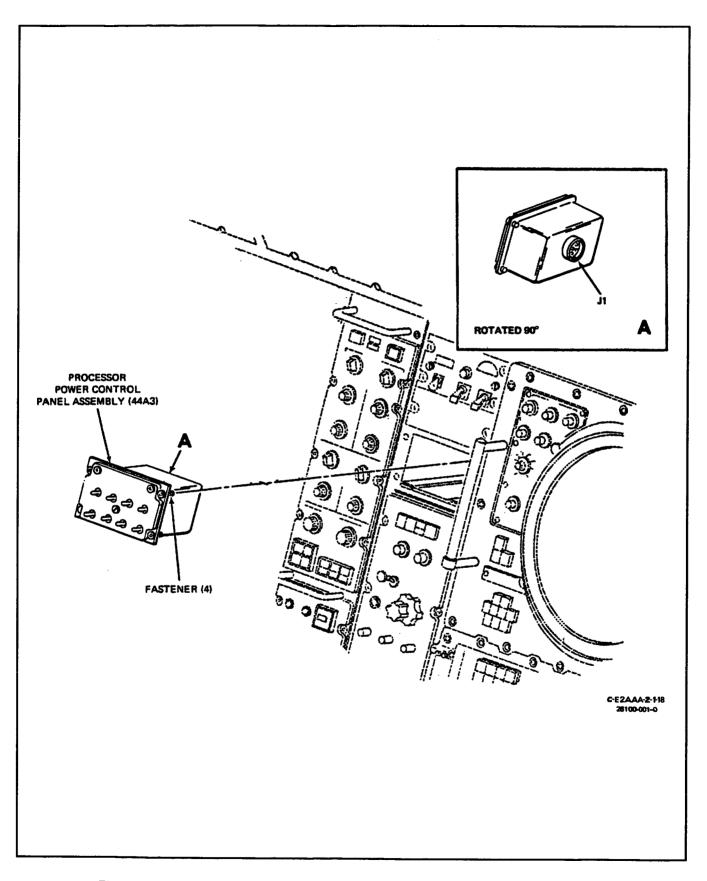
Removal and Installation of Processor Power Control Panel Assembly
